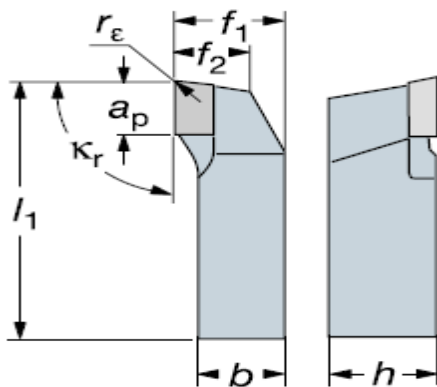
Cutting Tool Specifications, Reference: [12]
